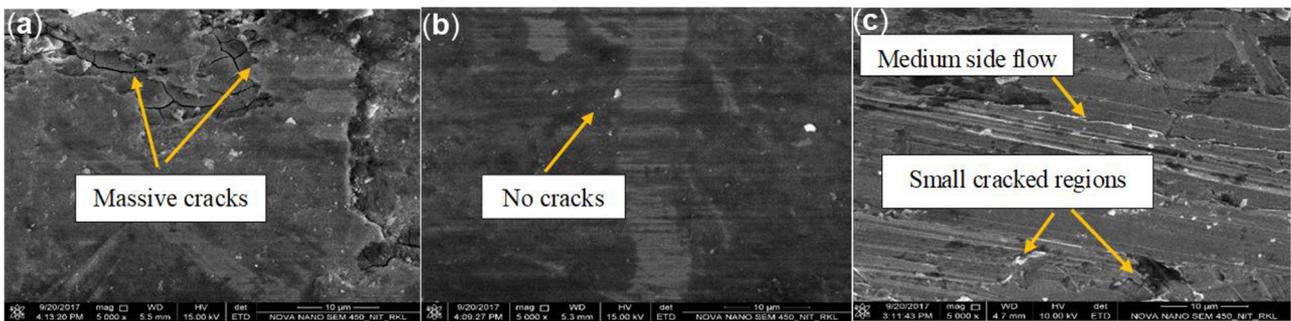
Morphology of the machined surface using (a) aluminium oxide, (b) copper oxide, and (c) iron oxide based nanofluids.
